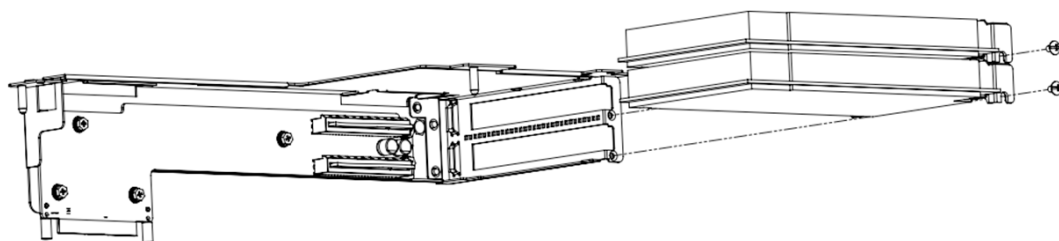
Assembly of FHHL Expansion Cards/ 安装全高半长扩充卡 / 安裝全高半長擴充卡
